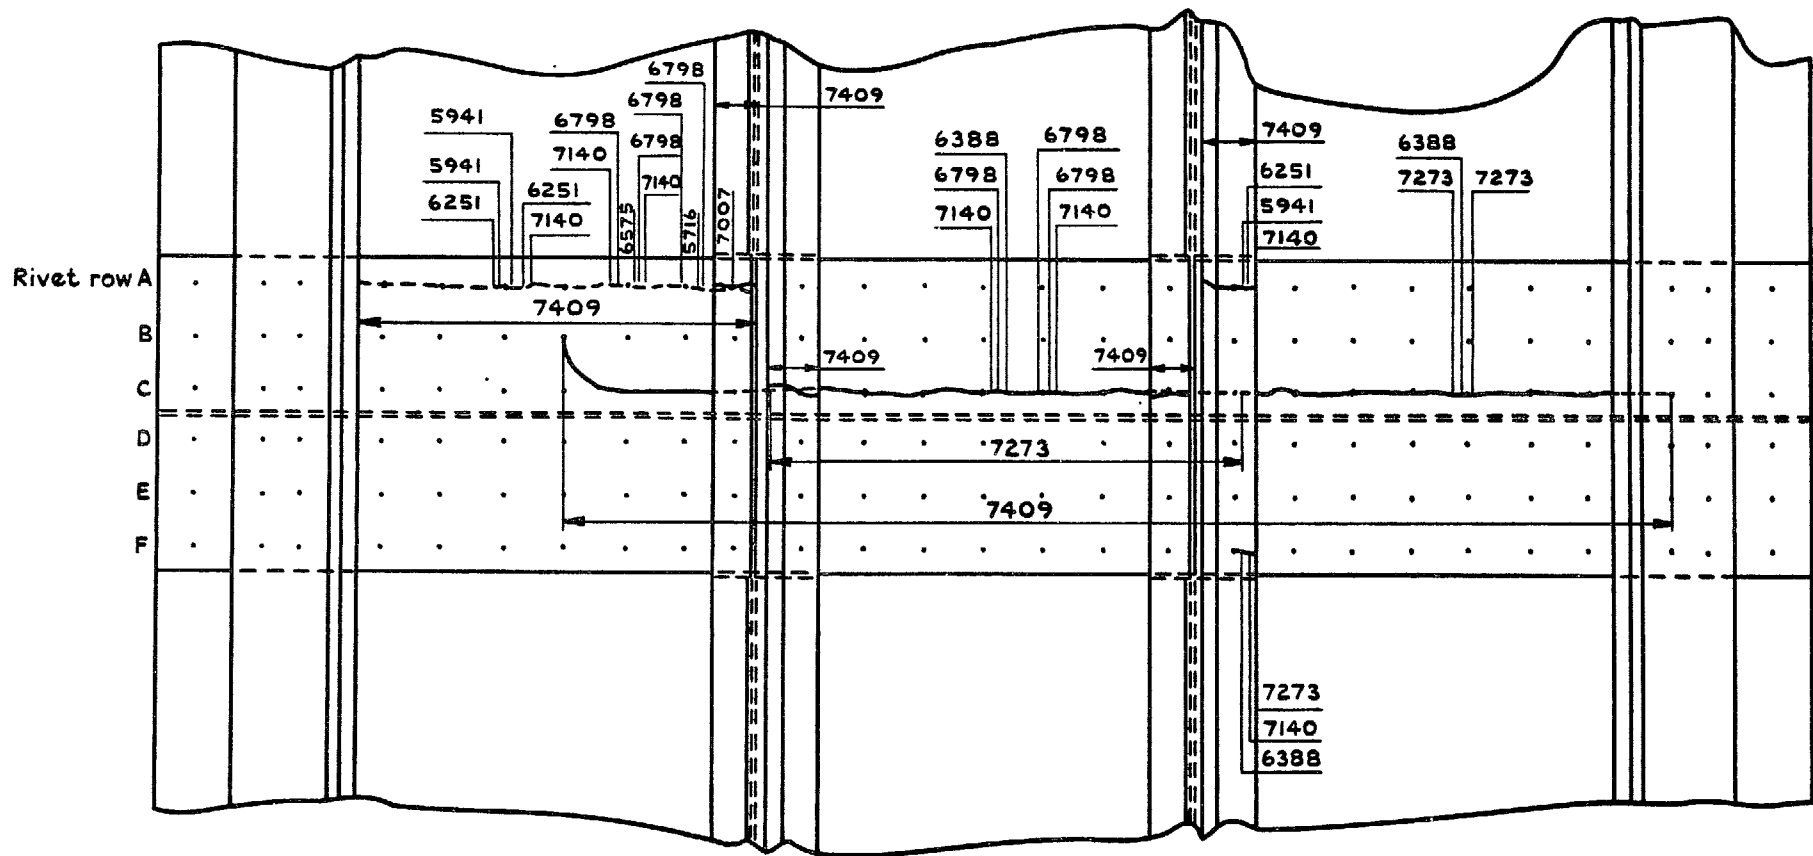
Fatigue failure of specimen No.13 tested using CMFT 80 load and temperature sequence
